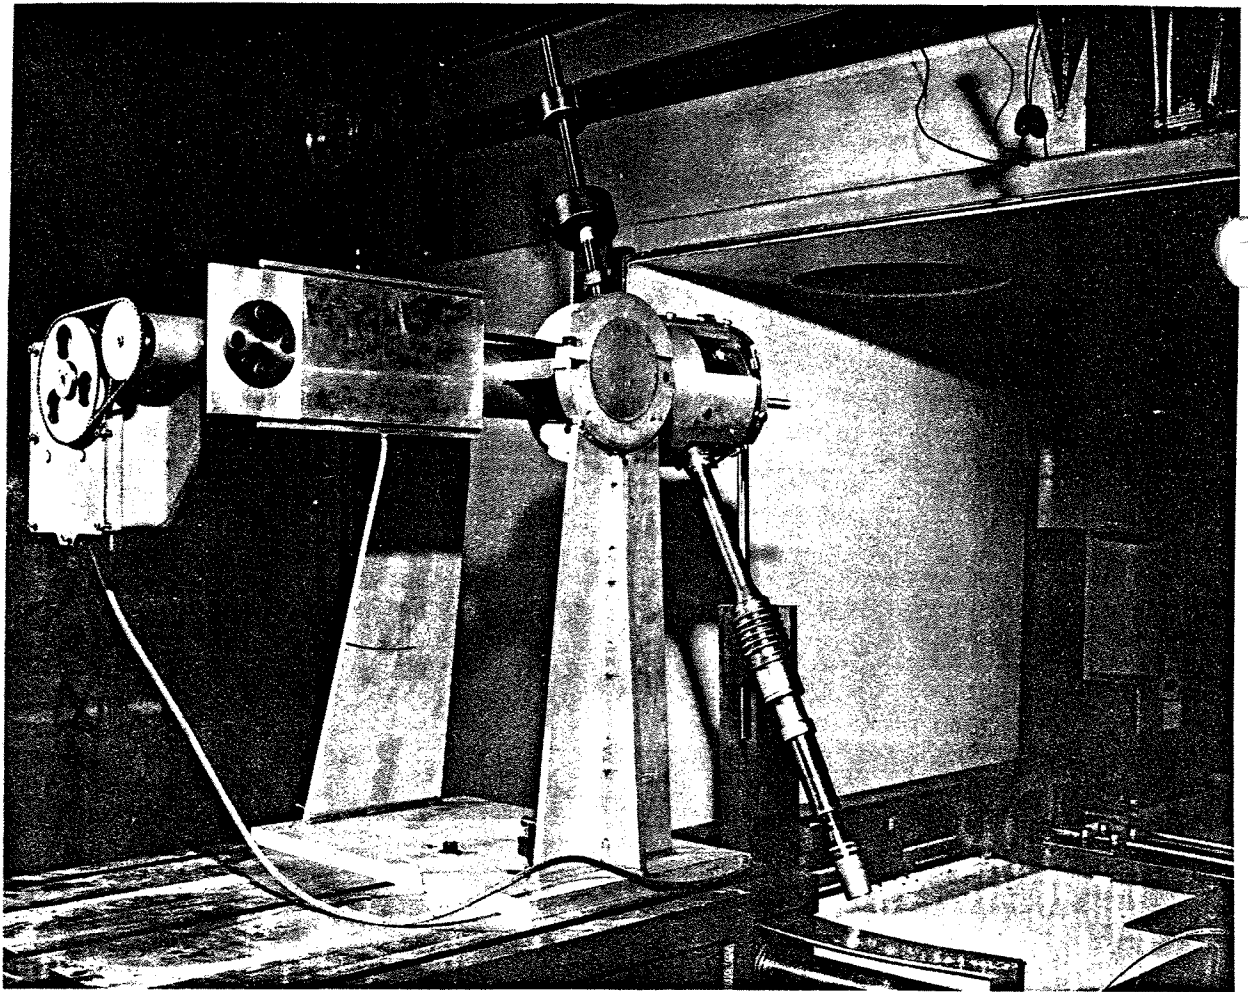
c.5 Drift tube mounted in electron beam-welding fixture.
